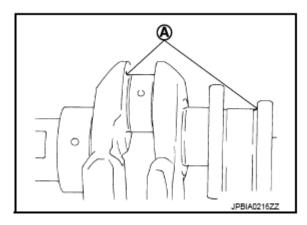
Identifying Crankshaft Fillet Area Courtesy of NISSAN NORTH AMERICA, INC.
